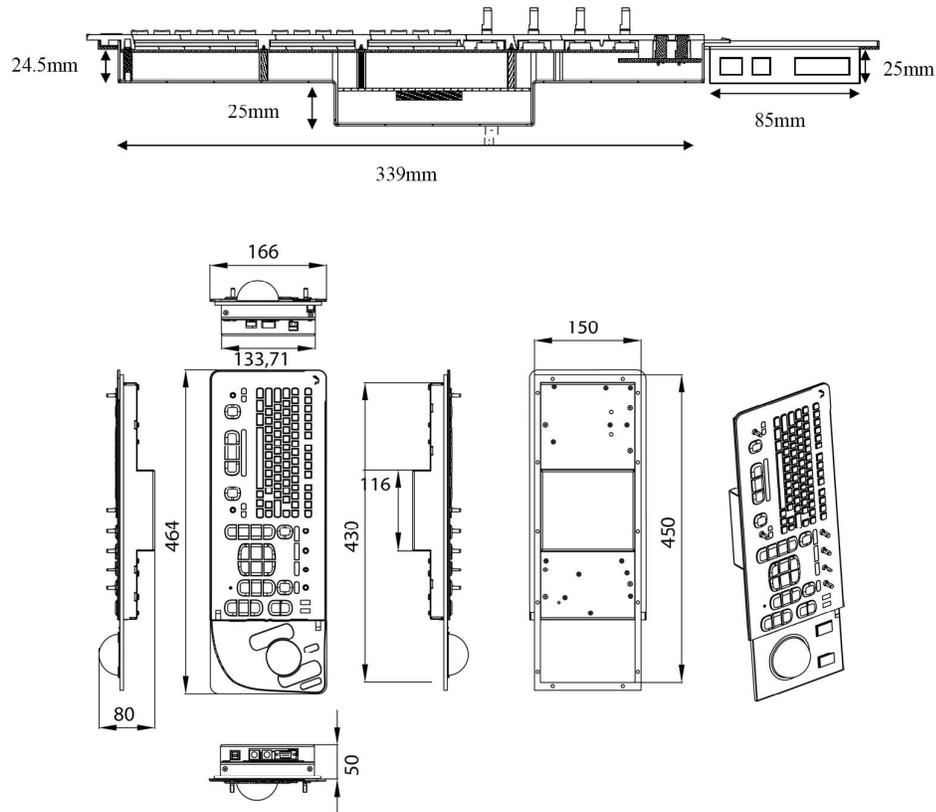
Transas ES6 dedicated keyboard dimensional drawing
